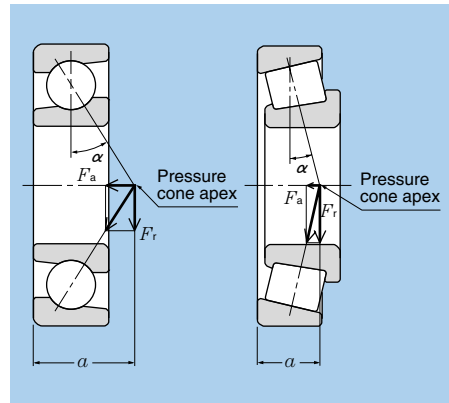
Bearing Pressure Cone Apex and Axial Direction Component Force
